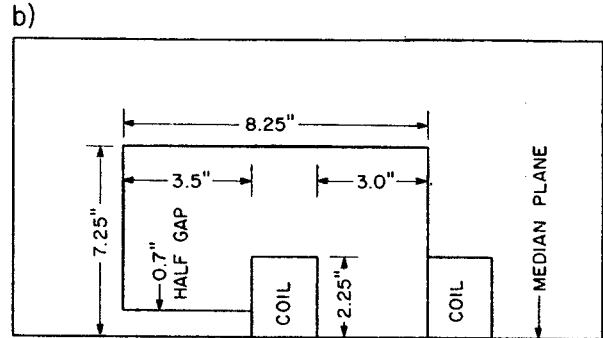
b) A section showing the dimension of the C-magnet perpendicular to the beam. The magnet is 10.25" along the beam.
